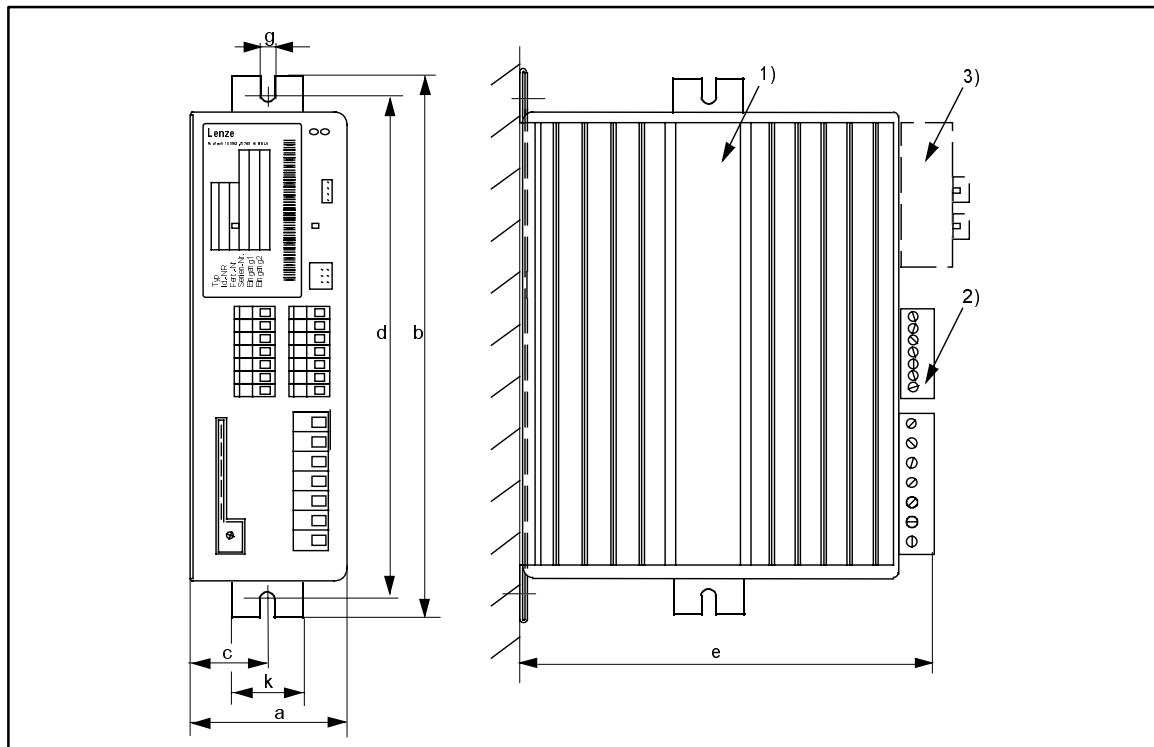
Dimensions 8201 - 8204: Standard assembly
